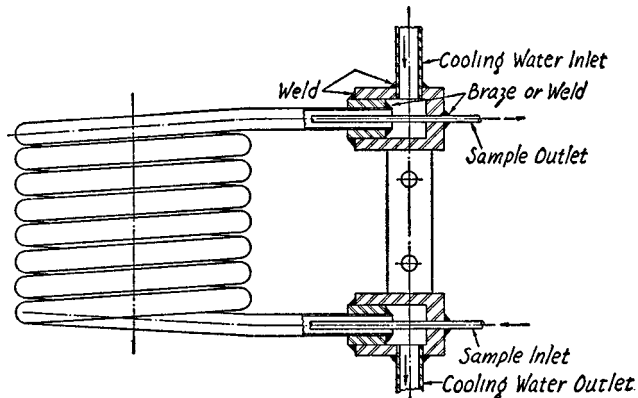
Double-Tube Helical Coil Heat Exchanger
